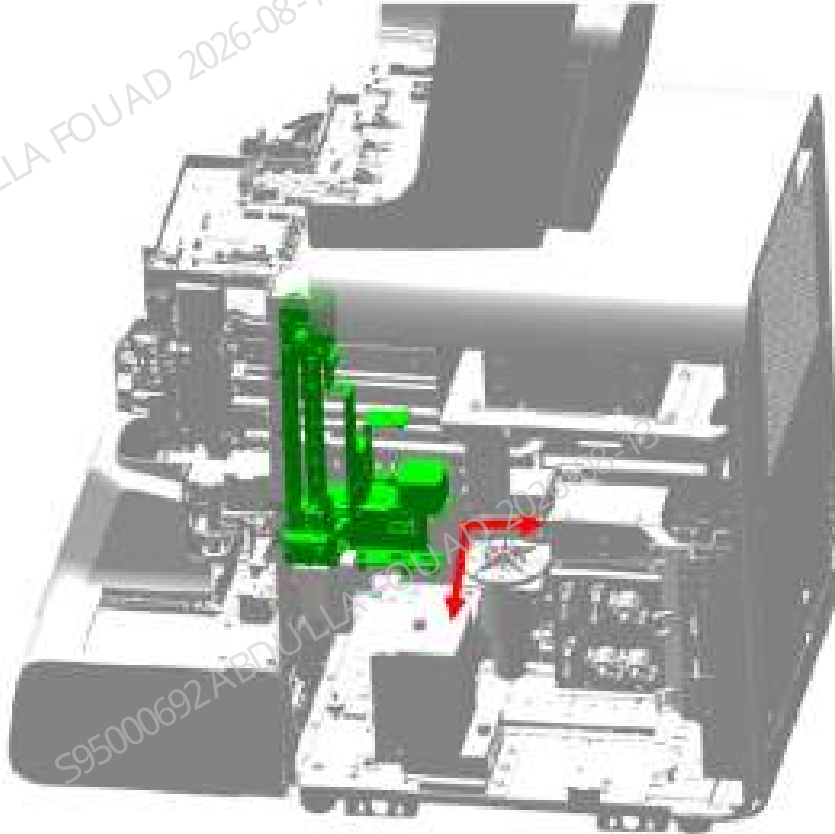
Check the FRU code of the paired wire, AL board to CB motor, M end
